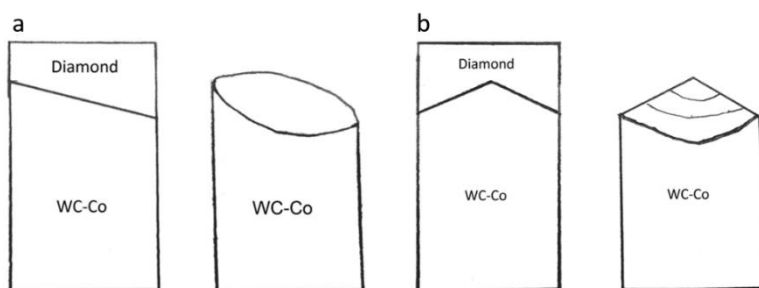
The modified joint geometry: a) angle-shaped, b) cone-shaped.
